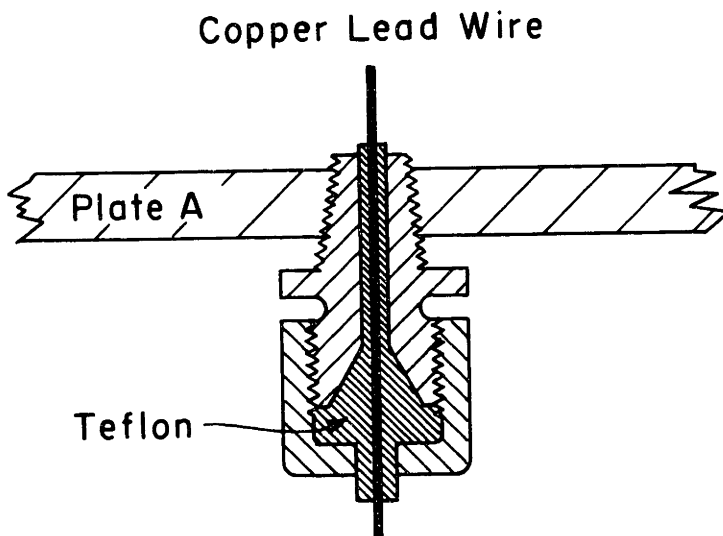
ELECTRICAL POWER LEAD ASSEMBLY
